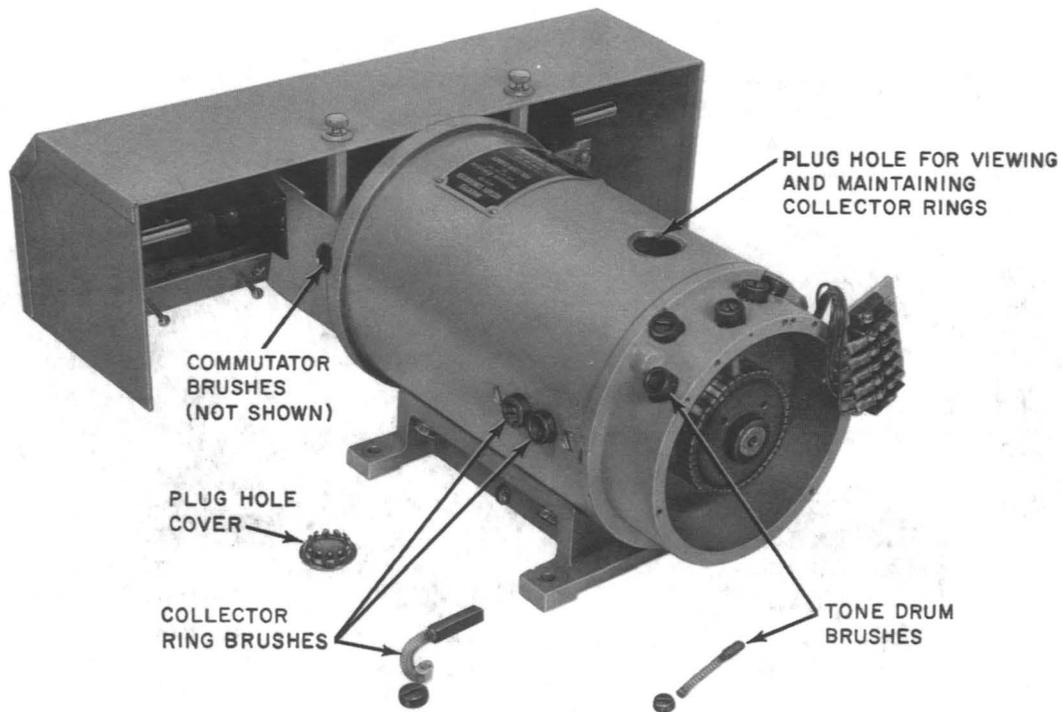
KS-5546 L14 Ringing Machine—New Holtzer-Cabot Design
